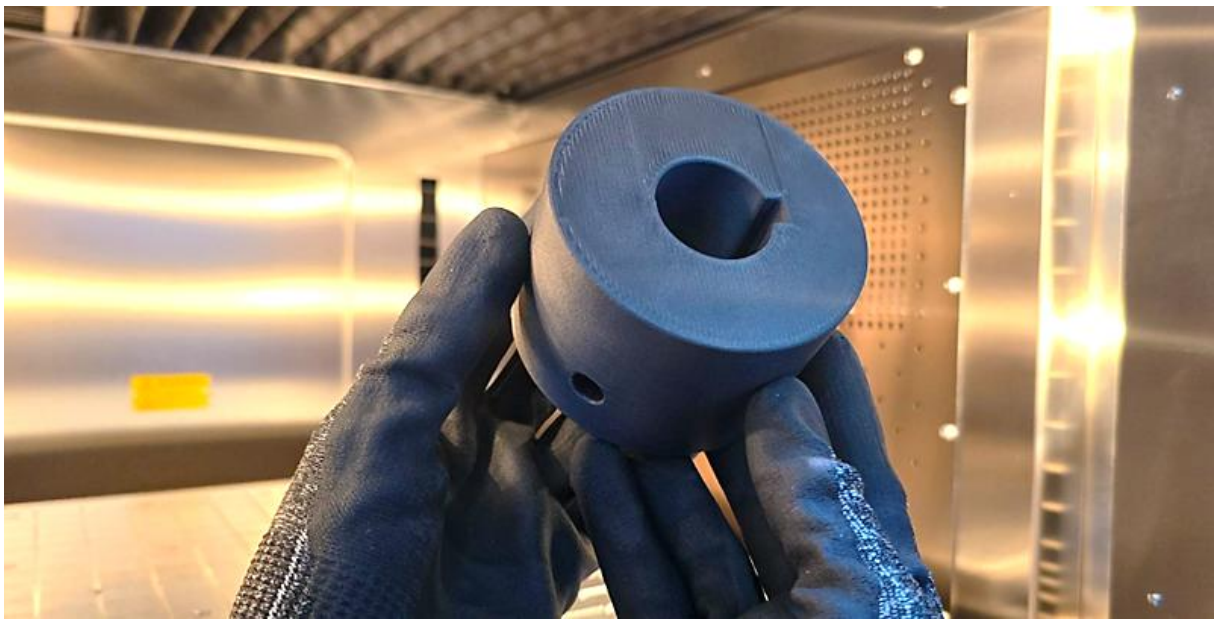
3D Printed Carbon-reinforced PEEK Motor Pump Bushing
